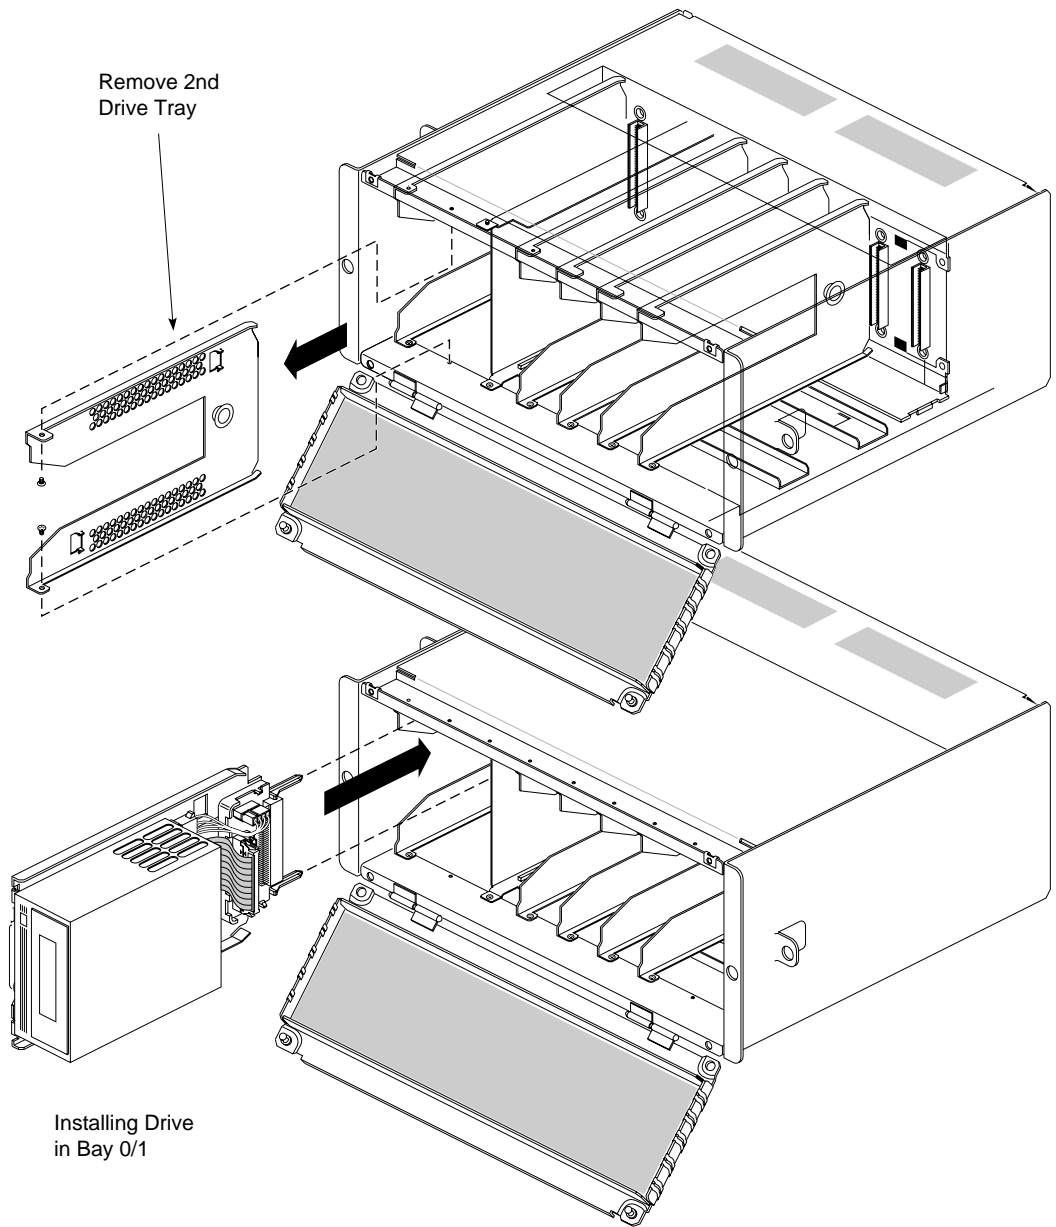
Removing the Drive Tray and Installing the Full-height Drive
